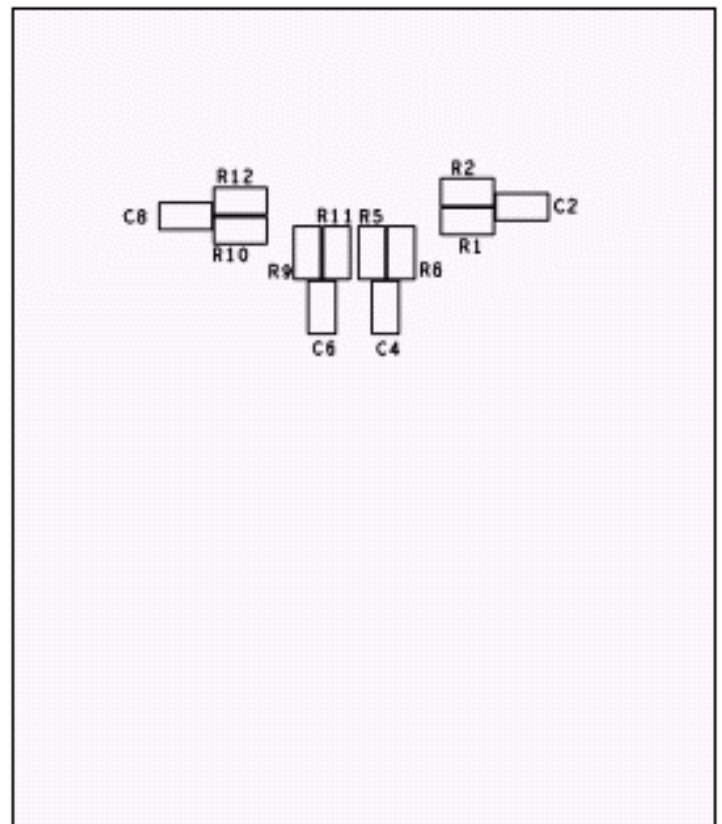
E1x4 75Ω impedance -- Silkscreen bottom layer layout (view
